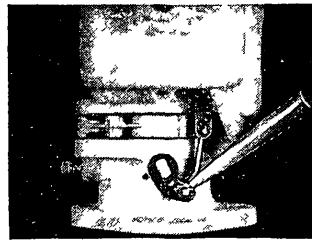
Install pump connector link and pin spring. Connect in center hole
